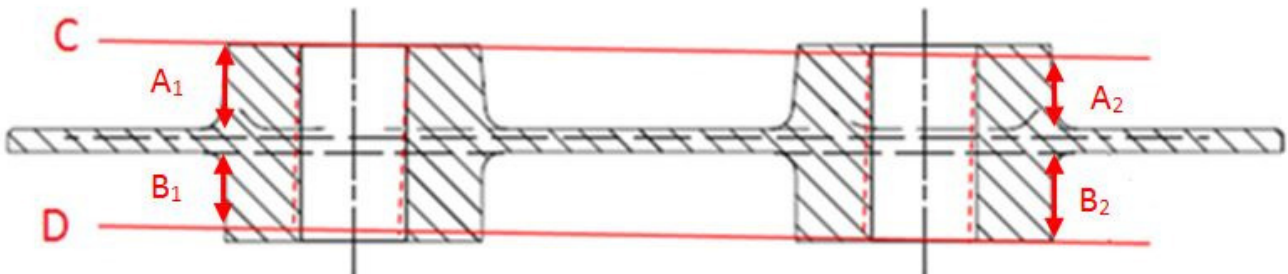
Section M-M Fitting Plate P/N 109-0330-17
